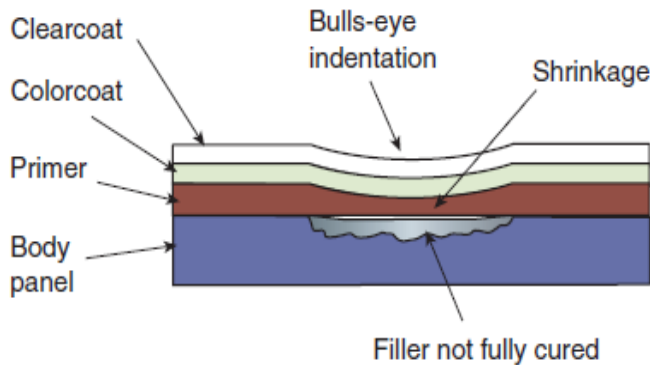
A bull's-eye is a depression formed over a repair area. It is caused by shrinkage of repair materials that were sanded too soon or from improper featheredging when sanding. You have to spray on primer-surfacer and block sand larger areas to correct a bull's-eye problem.
